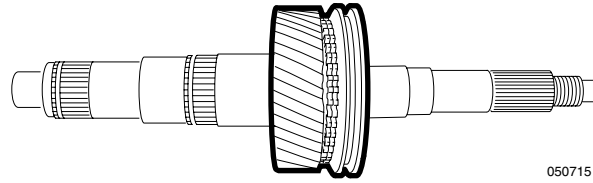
Fitted position of reverse gear and 5th/reverse synchro unit
